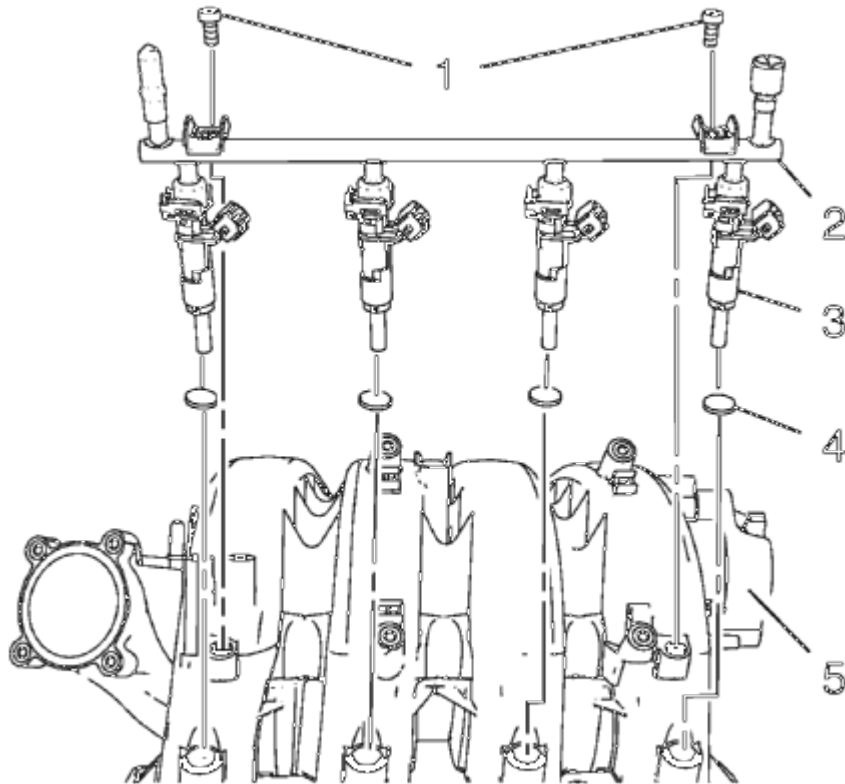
Intake Manifold, Multiport Fuel Injection Fuel Rail, Fuel Injectors, Seals And Bolts
